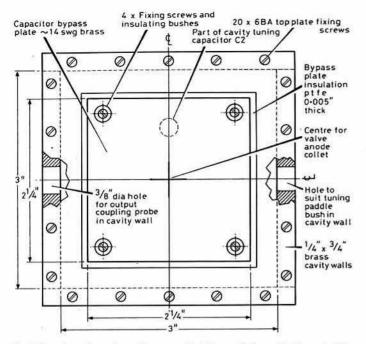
Top view of anode cavity assembly. The cavity top-plate has a 1-25in diameter hole in the centre, to clear the valve anode sleeve
